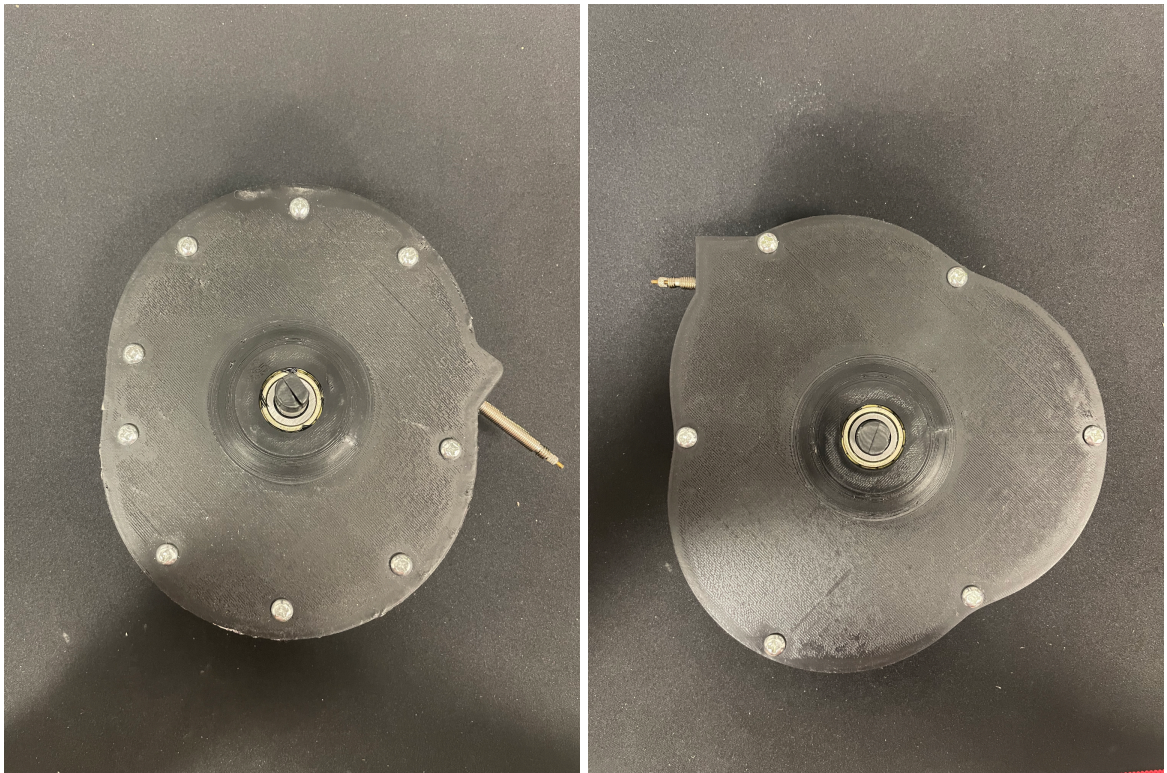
3D printed Wankel and LiquidPiston engines with closed housing
